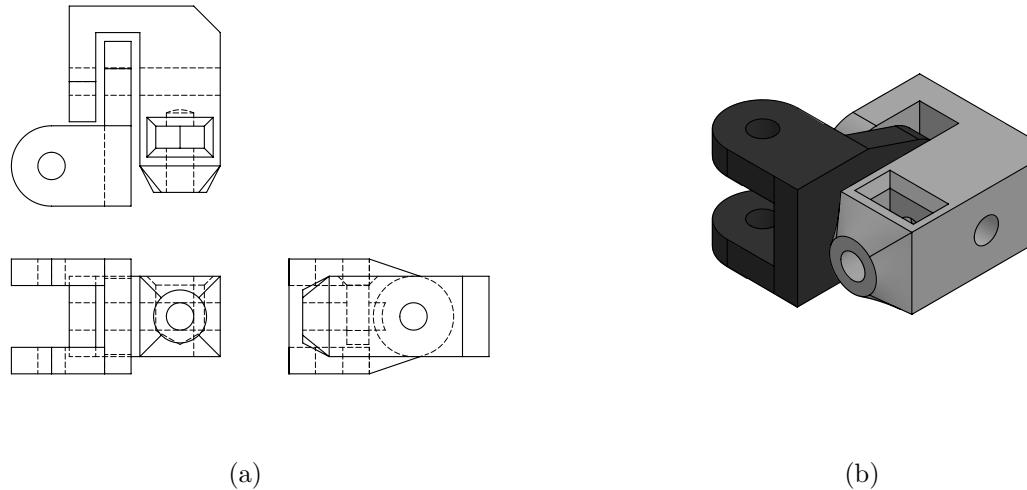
Detailed drawings of the two-axis hinge component in the differential system (without fasteners)
